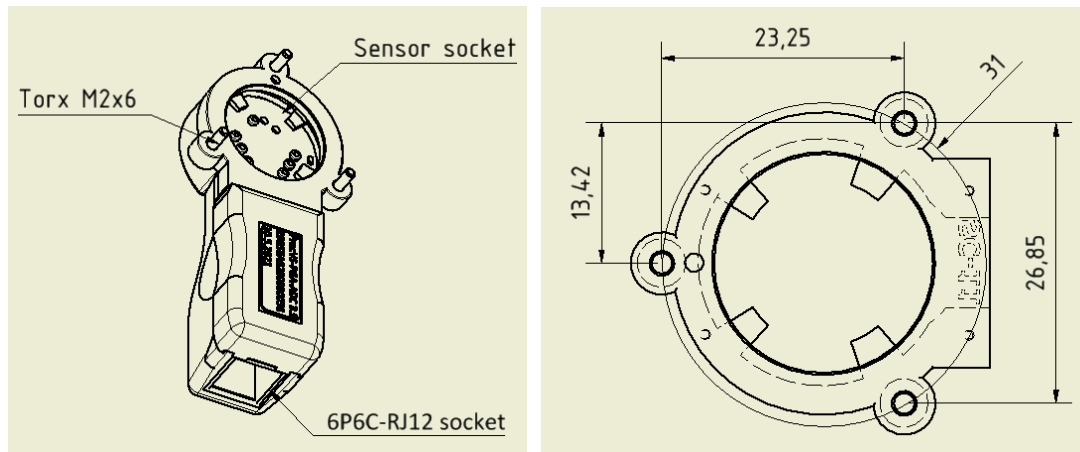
Drawing of PrecVS-PGA-ADC 3.6 (left). Flange with three Torx M2x6 screws (right). All dimensions are in mm.
